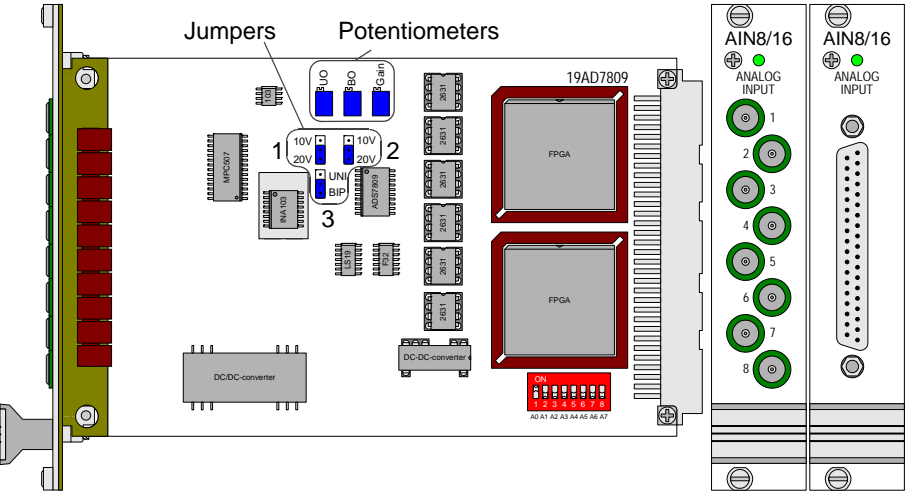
Pro-AIn-8/16 REVA: Board and front panel
